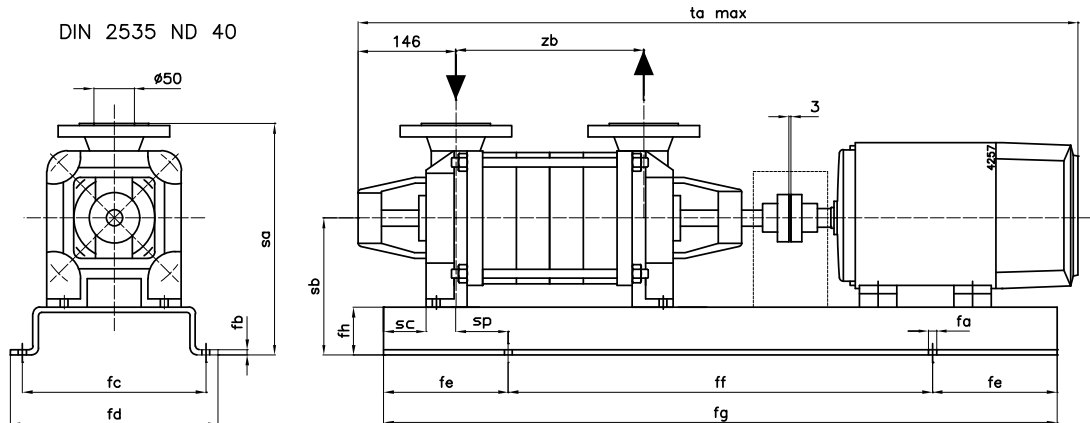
Dimensions sketch unit MCHZ(S) 14b.
